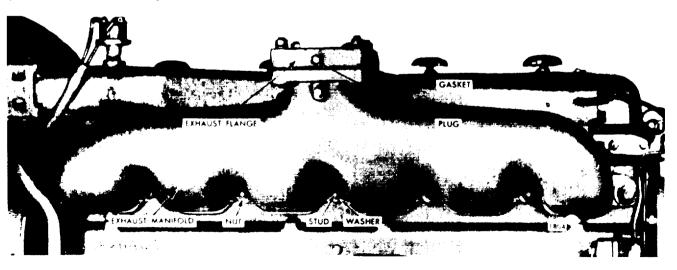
G-1. Air Cooled Exhaust Manifold Mounting
